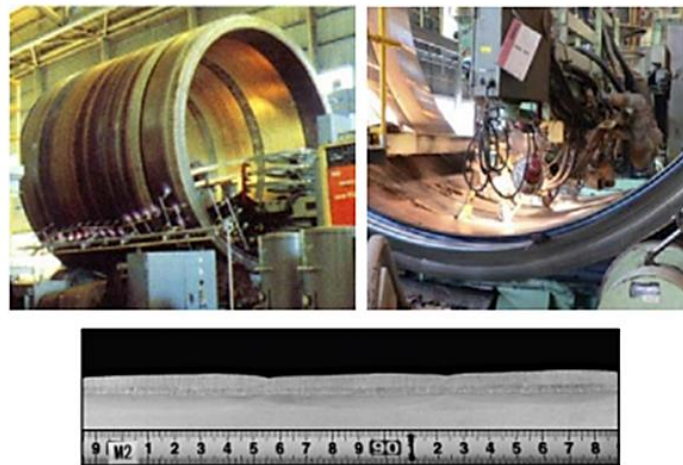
Strip overlay welding of inside shell ring (Takauchi, H. et al; 2017)
